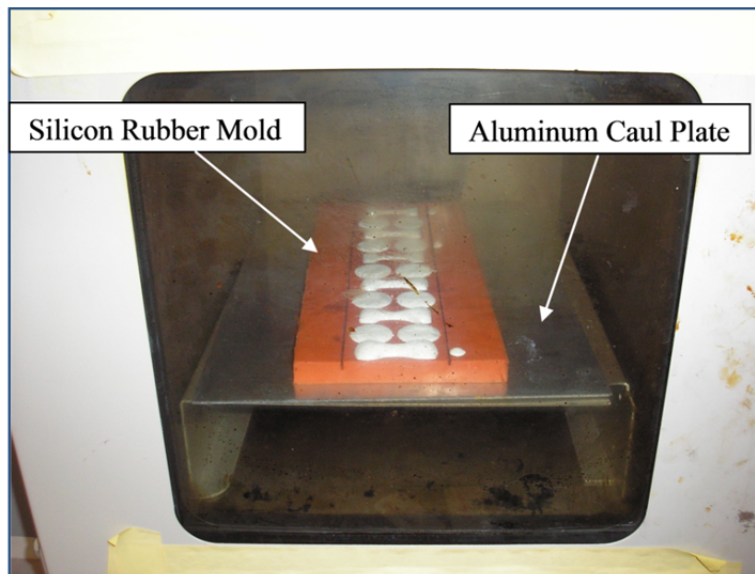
De-gassing Resin/Particle Mixture in Mold for 3-0 Composite Test Specimens
